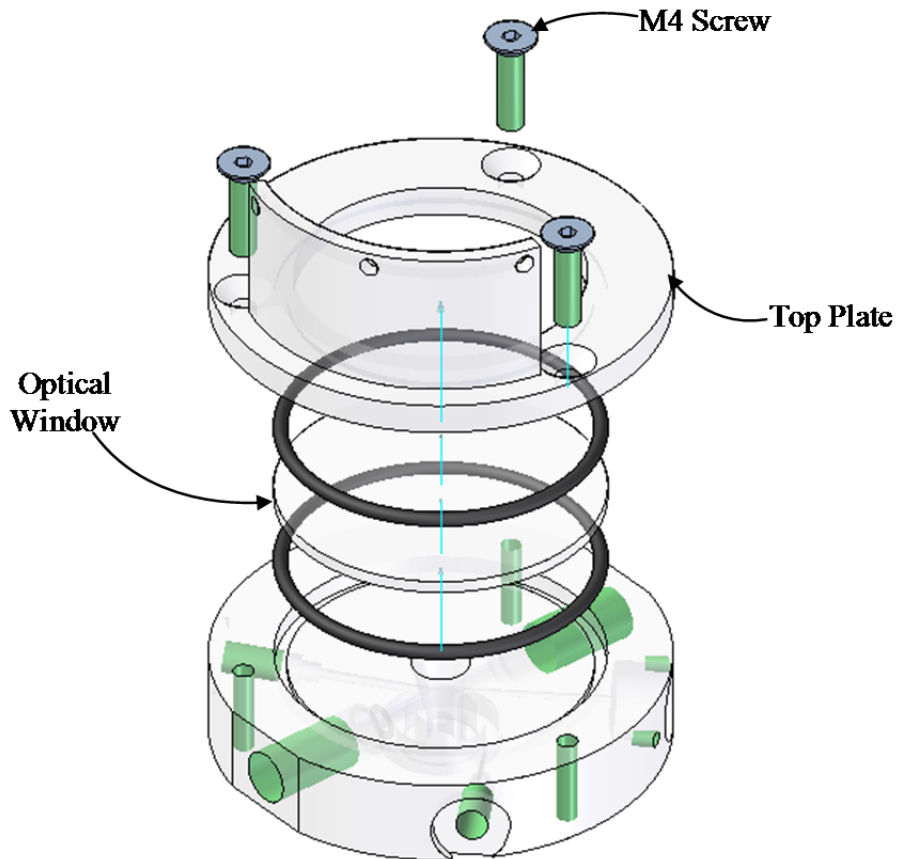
Rendered exploded view of the main body, top plate and optical window assembly
